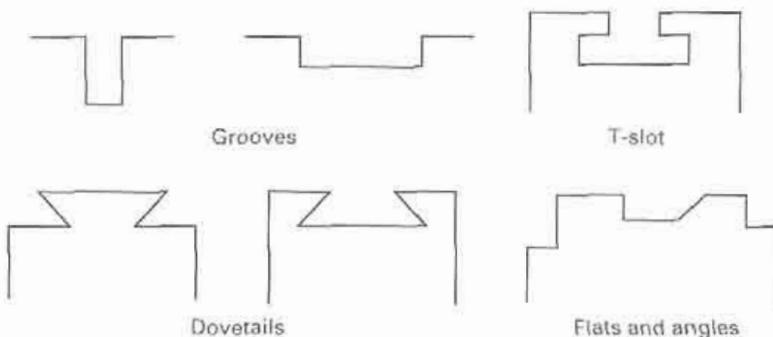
Types of surfaces commonly machined by shaping and planing.
